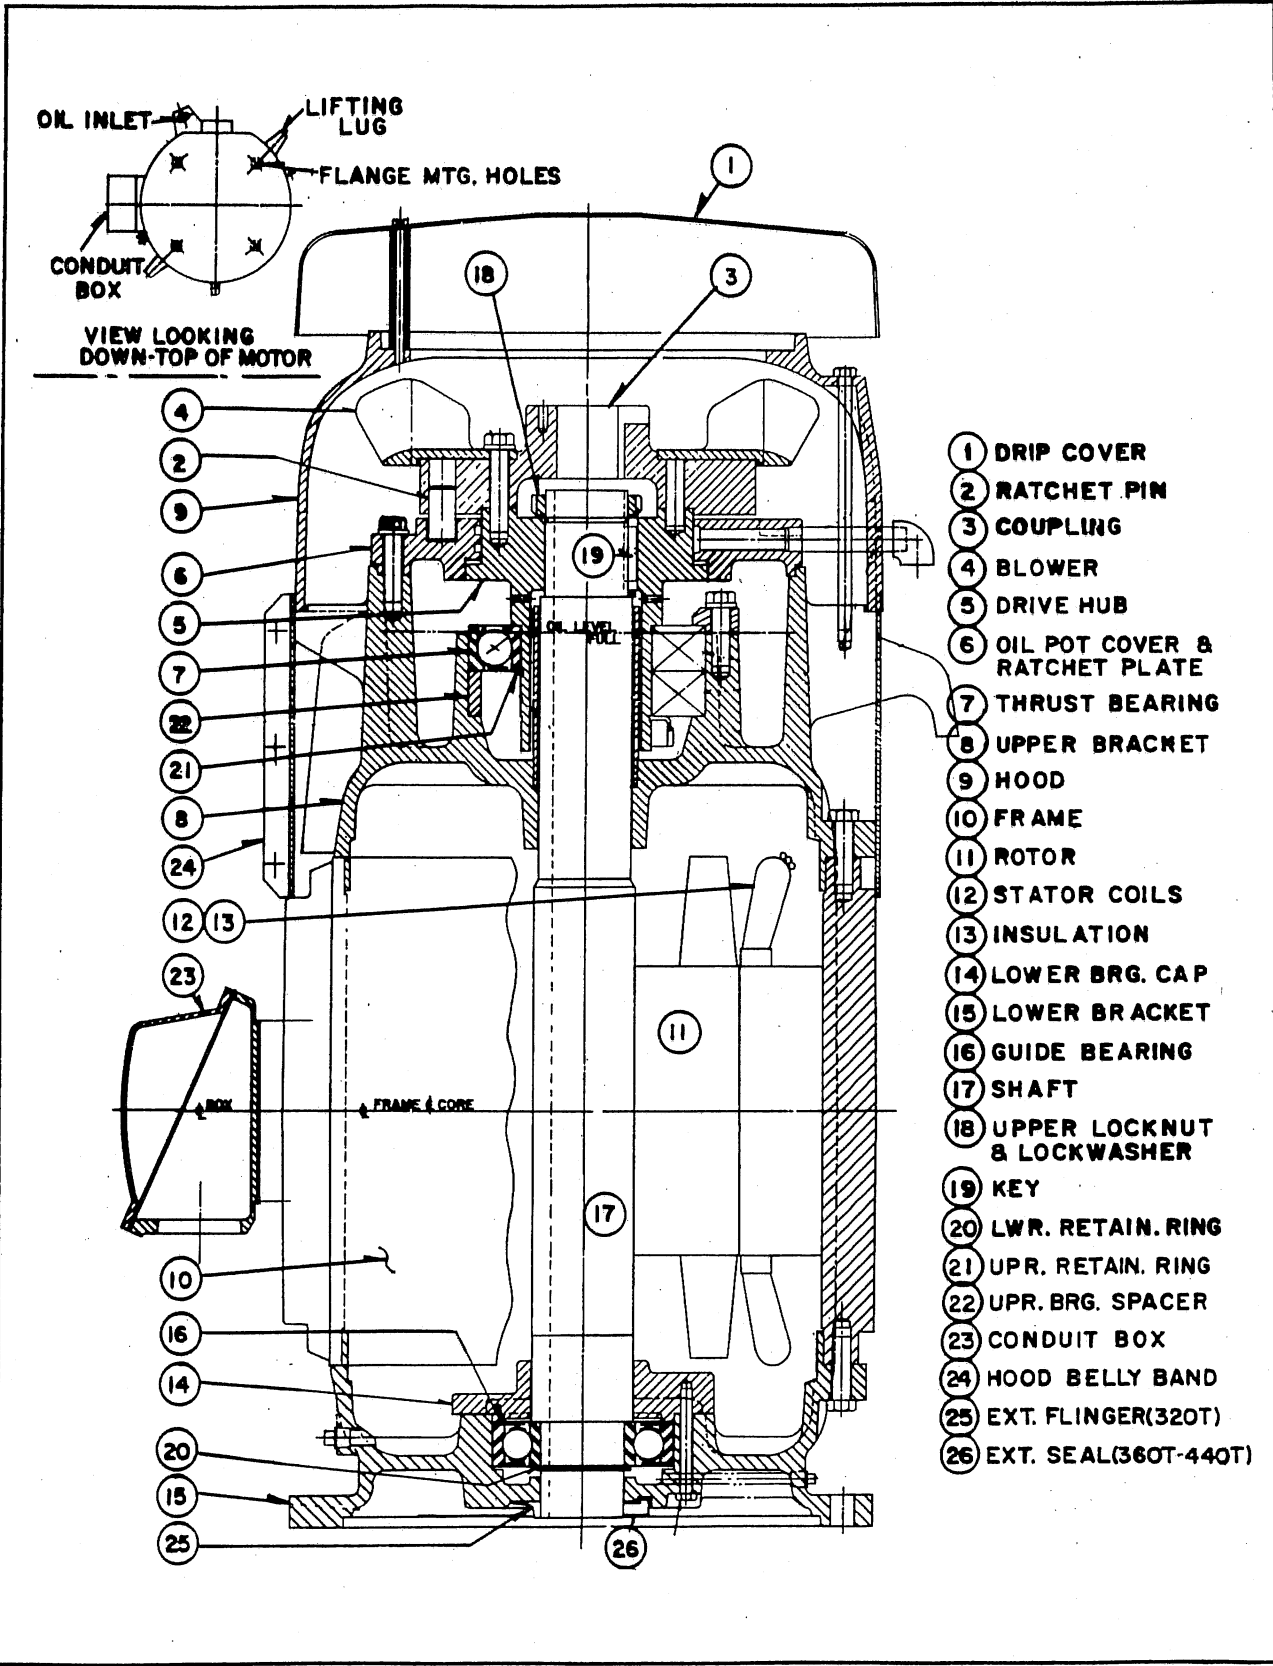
Arrangement of Parts, Vertical Hollow Shaft Fan-Cooled or Type T Life-Line Explosion Proof Motor, Frames 324T Thru 445T (Solid Shaft Motors Use Same Construction Except Ratchet Pins are Omitted)
